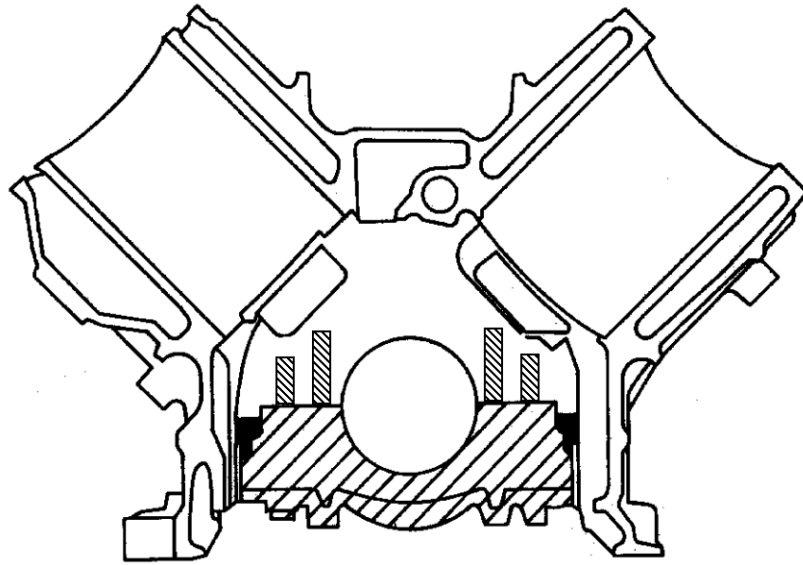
Schematic of sectioned V8 cylinder block showing main bearing cap and location of drilled holes
